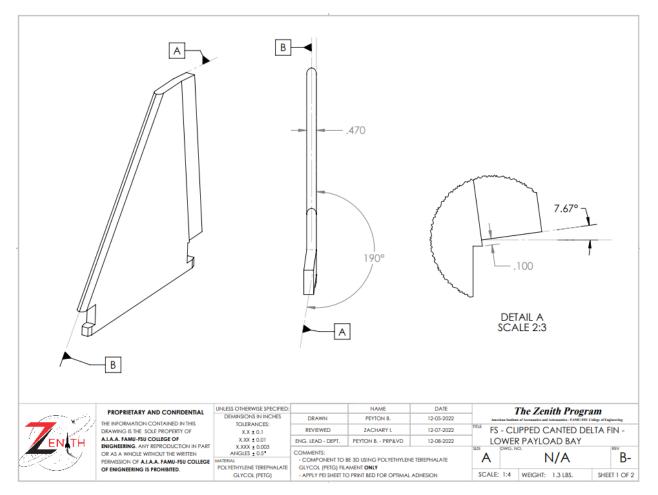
Canted Clipped Delta Fin CAD Drawing Sheet 2 of 2
